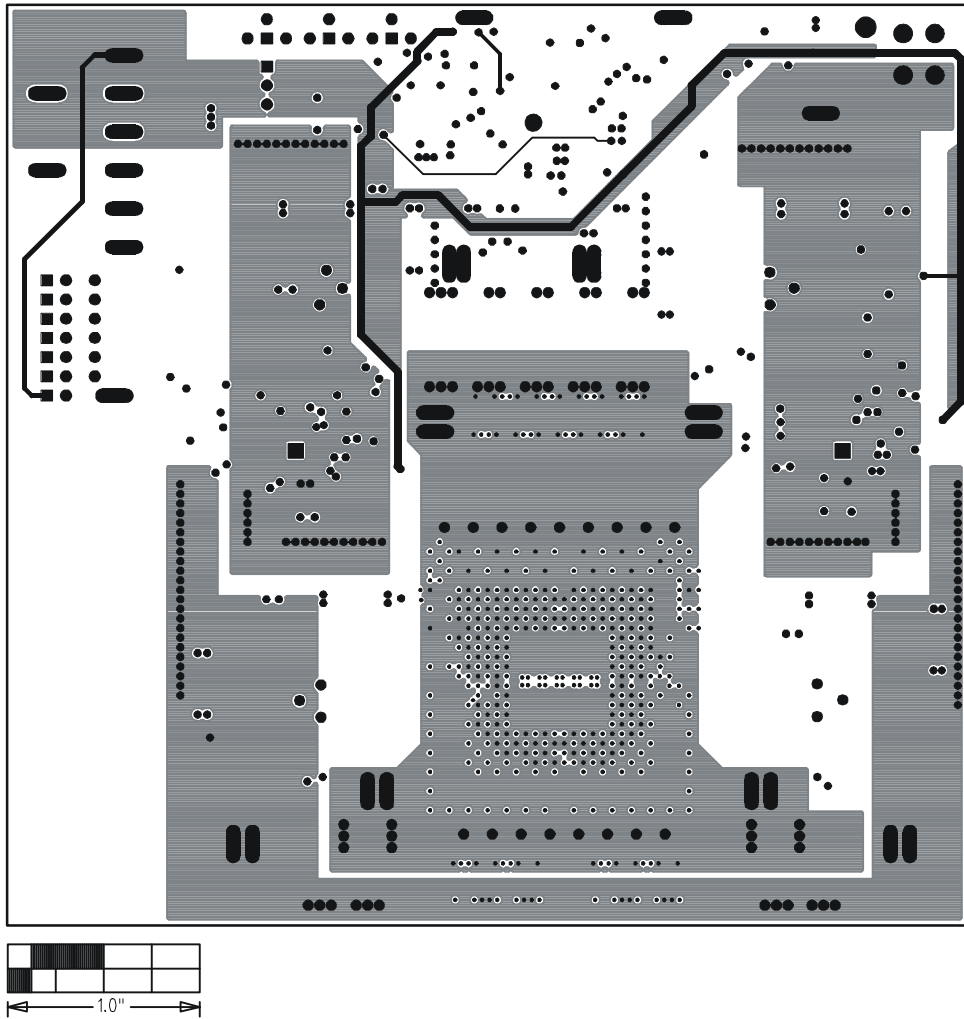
MAX1544/MAX1545 EV Kit PC Board Layout – Layer 4
